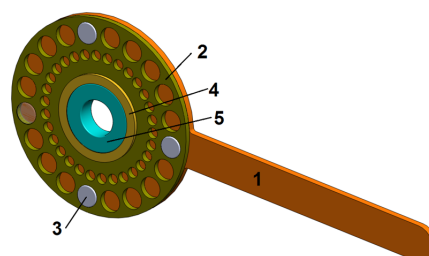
View of the tail: (1) tail, (2) bored disc, (3) magnets, (4) holding cylinder, (5) ball bearing.
